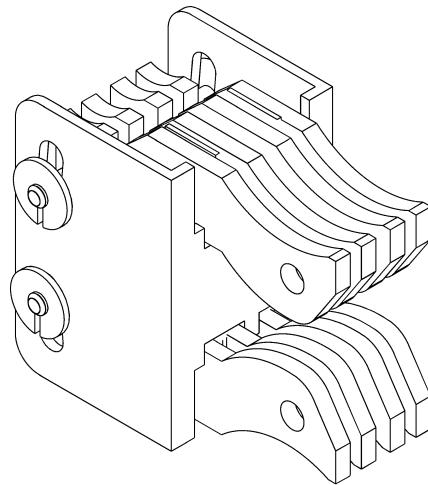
Primary disconnect assembly for EGS08, EGF08, and EGH08 breakers.
